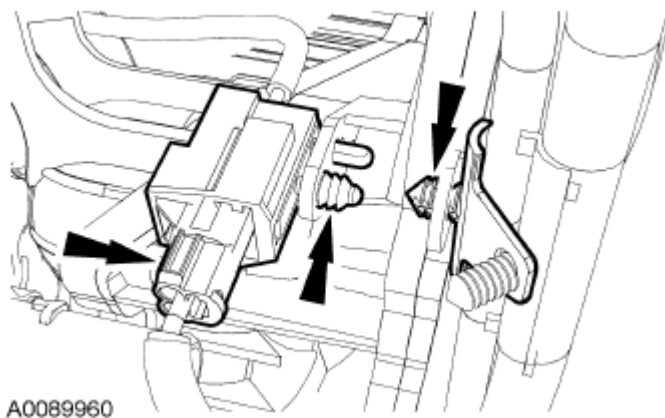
Locating Knock Sensor And Wiring Harness Retainers
